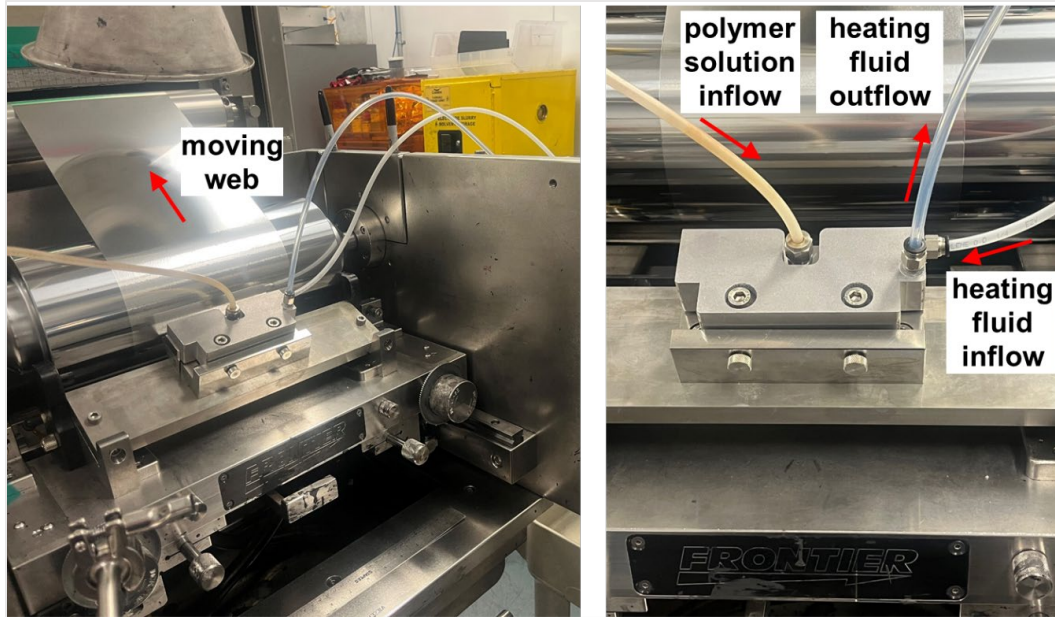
Slot die heater mounted on polymer slot die roll-to-roll coating machine.
